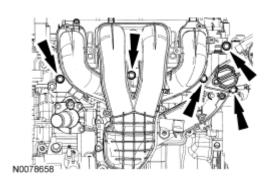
Locating Intake Manifold Bolts Courtesy of FORD MOTOR CO.
